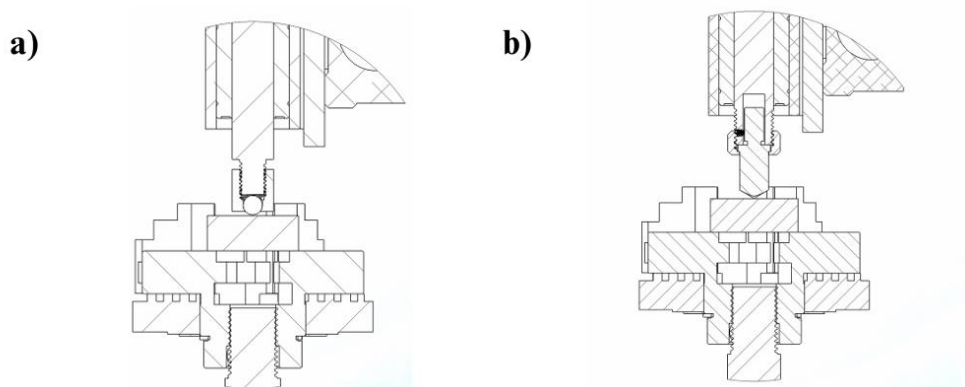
a) Cross Sectional view of pin on disc machine. b) Cross Sectional view using a diamond indenter
